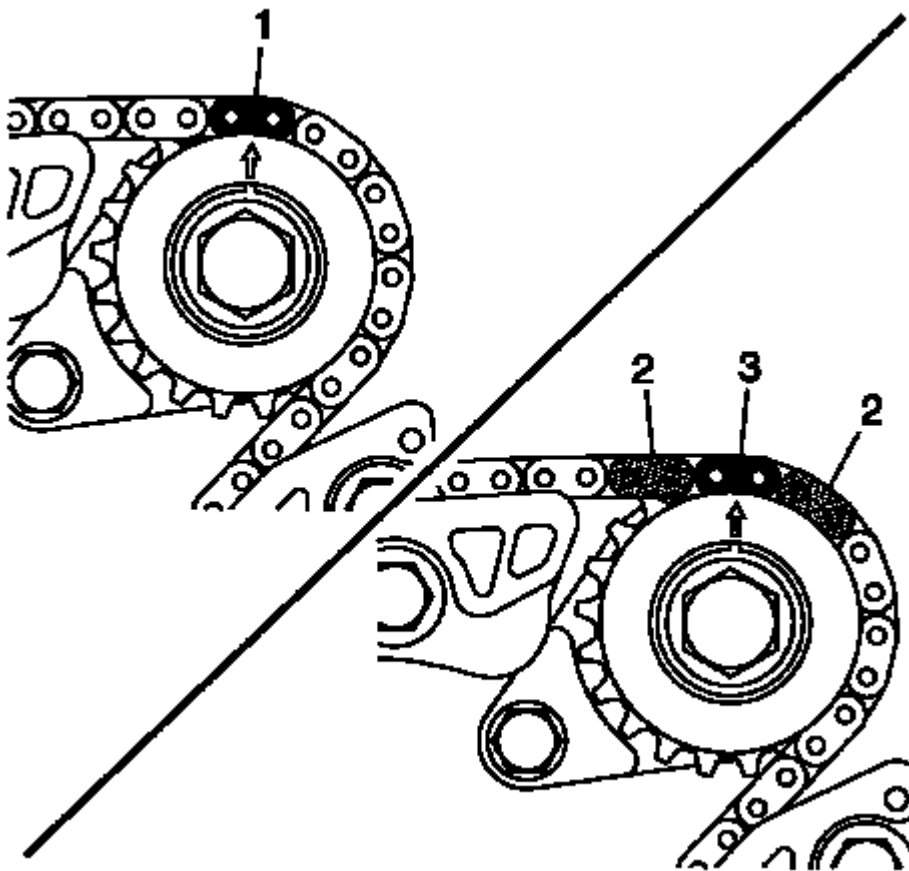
View Of Intake Side Balance Shaft Sprocket Timing Mark
